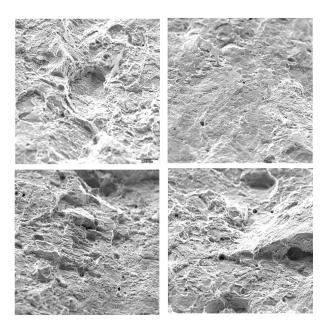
Fracture of the S1T5 specimen showing channel faceted surface.
